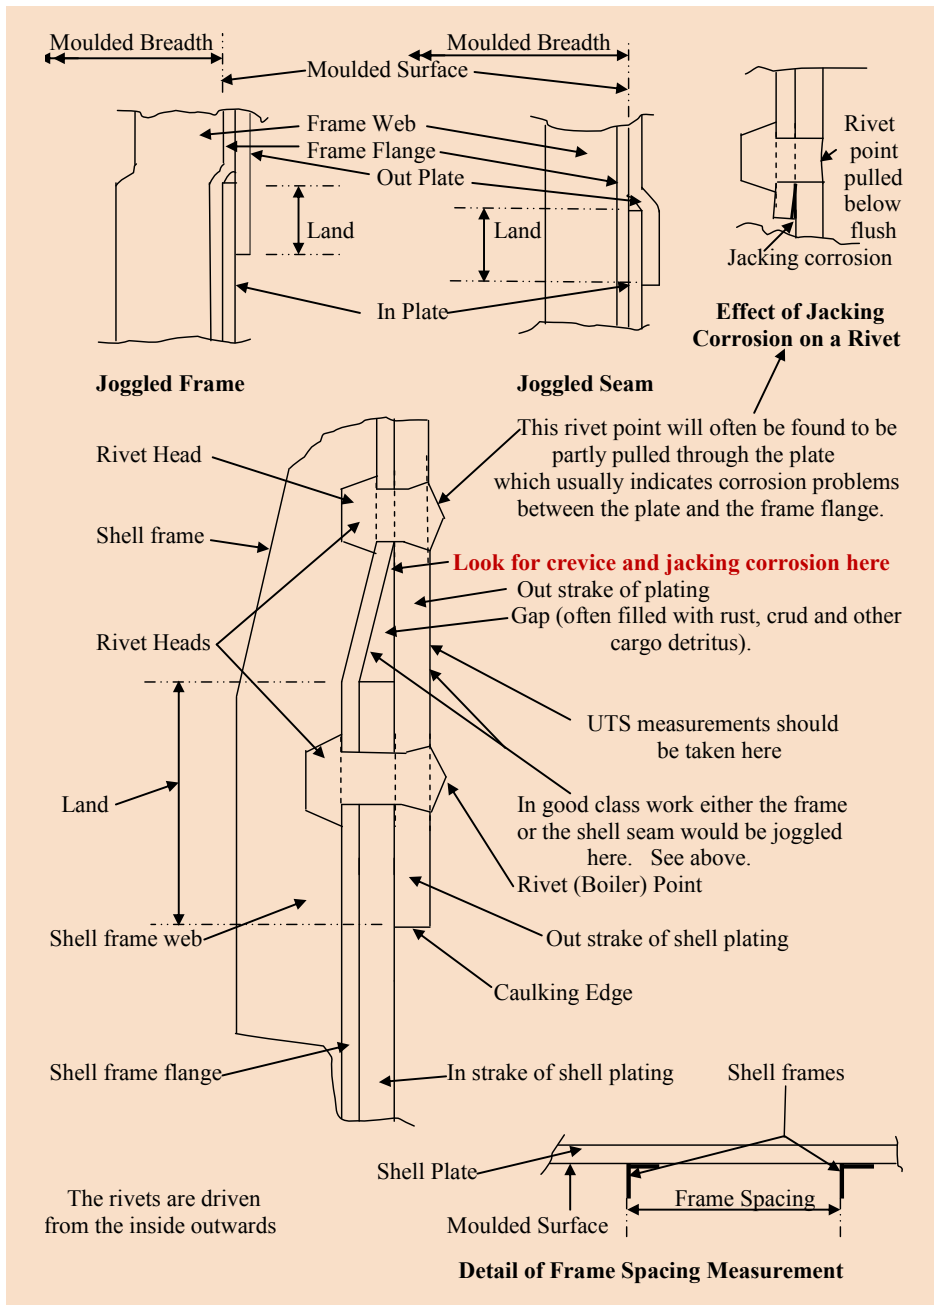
Section through a Riveted Seam in way of a Sprung Shell Frame
